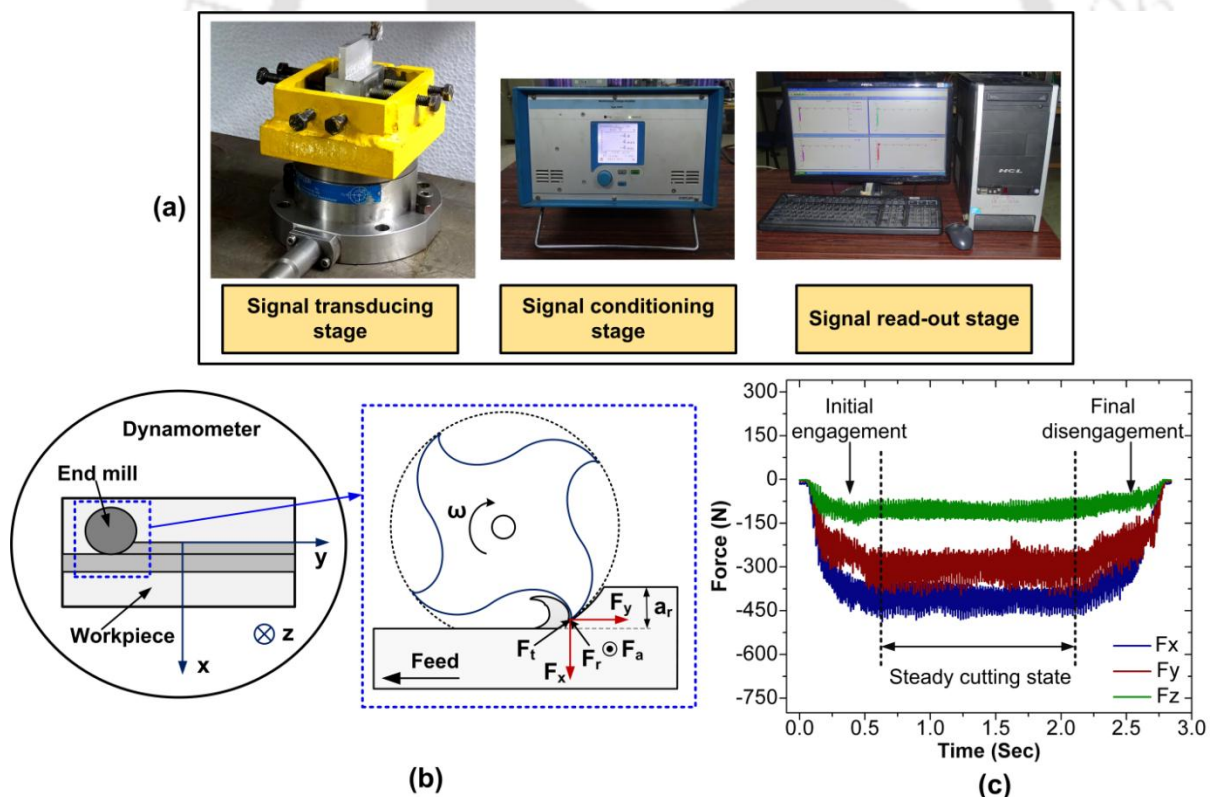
(a) Milling force measurement system, (b) Milling force components, (c) Typical milling force signal
